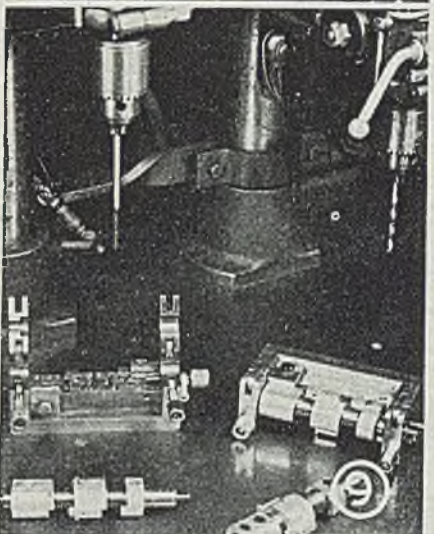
Unique drill jig accurately locates three members on a screw in exact relation to each other for drilling, also simultaneously "inspects" the complete assembly
